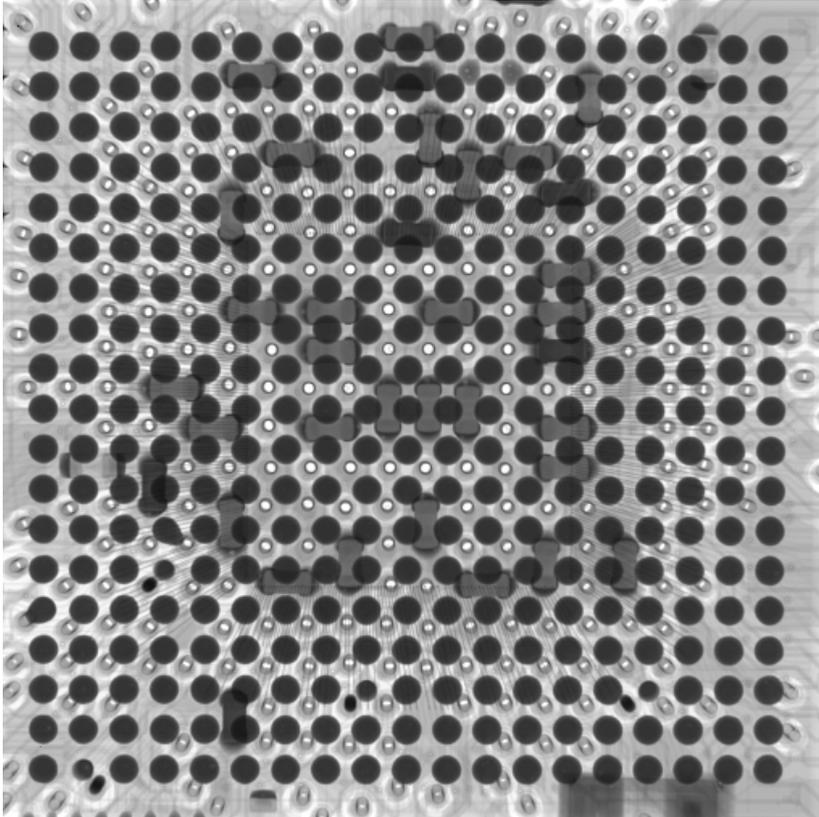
X-ray view of the BGA solder joints. Notice the tendency to solder movement away from the intended joints and towards vias.
